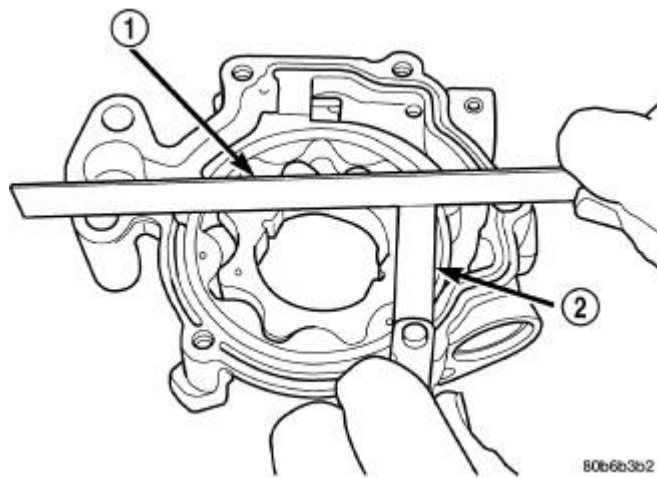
Measuring Clearance Between Outer Rotor And Body
